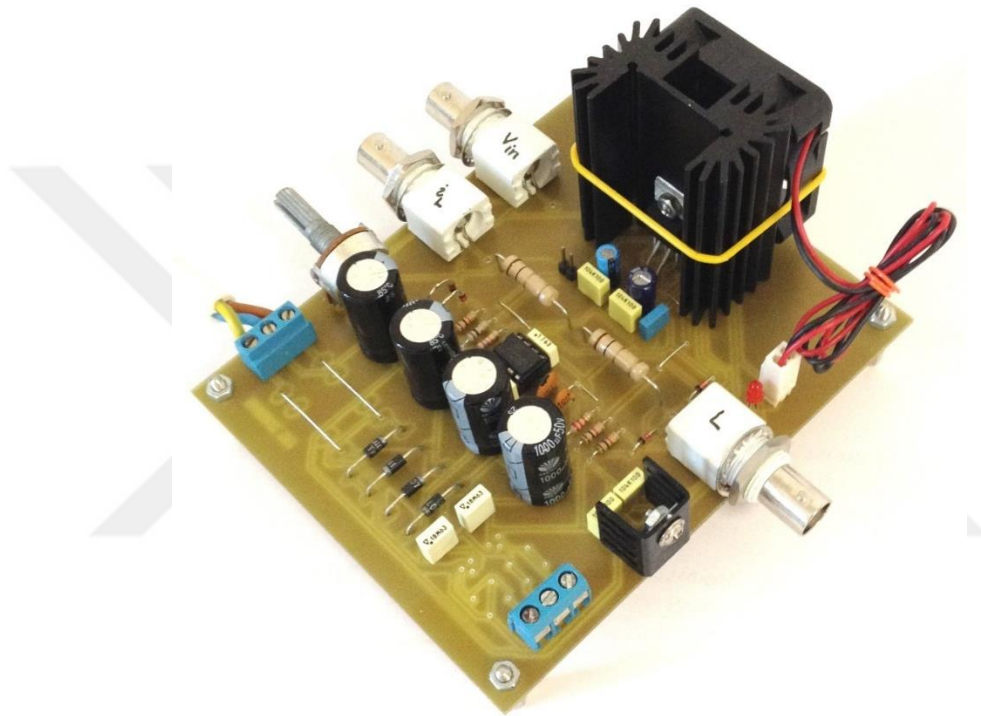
Assembled PCB of the closed-loop dual stage coil driver
